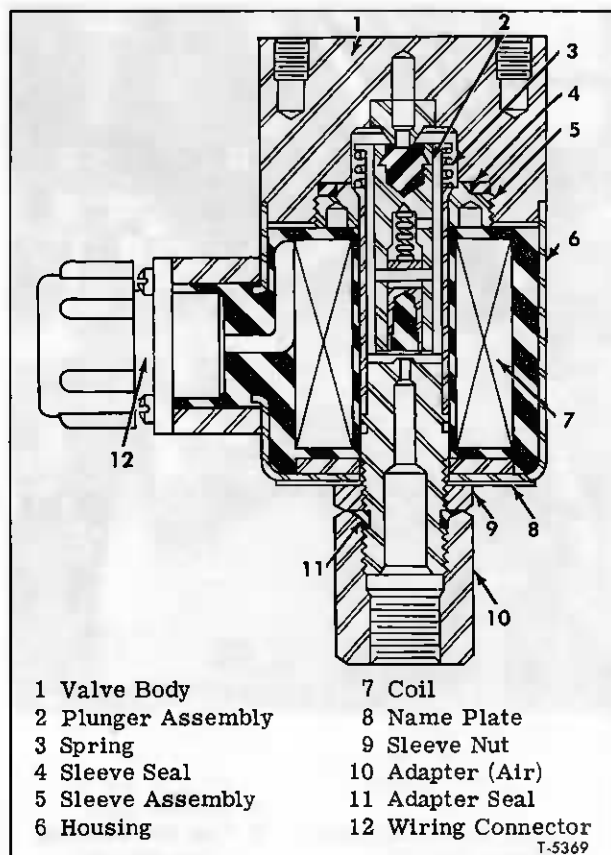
Engine Stop and Fast Idle Solenoid Valve
